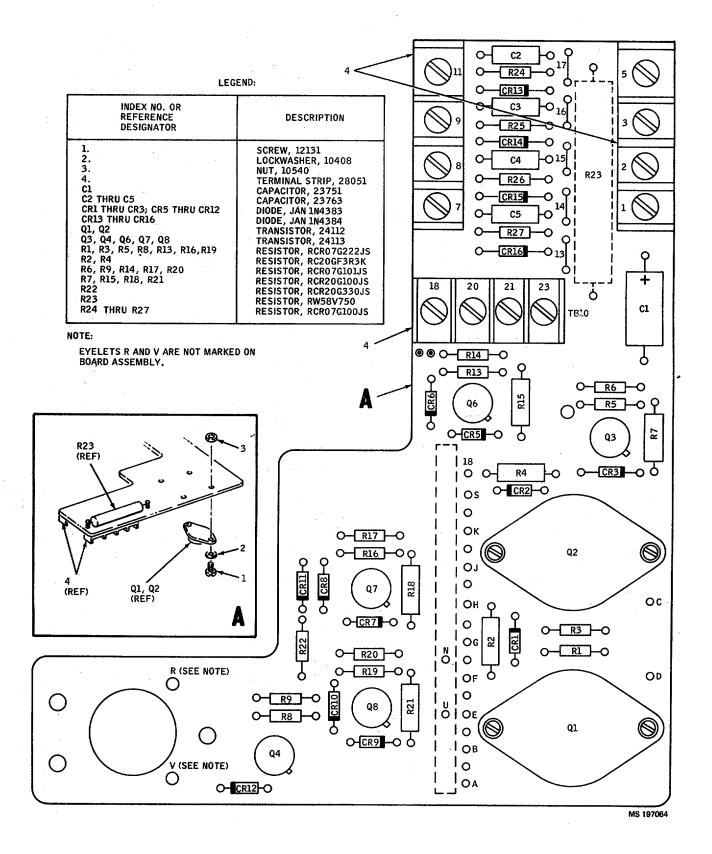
Printer Driver Board Assembly (76447-A0001), Parts Location
